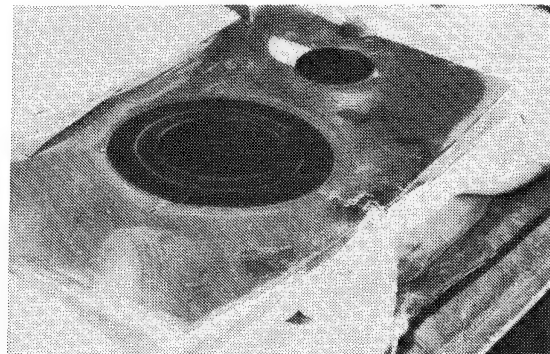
Patch Contouring and Bonding on CARE MOLD Male Tool
